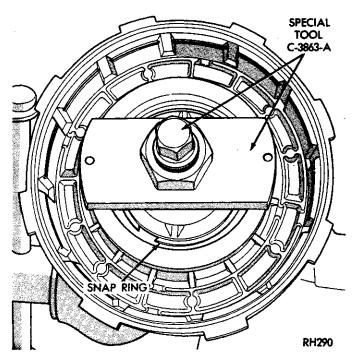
Removing Front Clutch Spring Retainer Snap Ring—A-727
